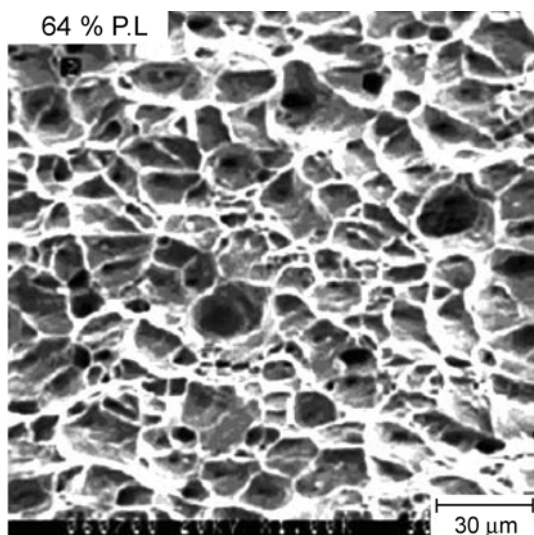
Fracture surface of the sintered compact with 64 % powder loading.
